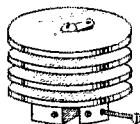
A heat-dissipating anode connector is made from the cooling fins of a 2C39A.
